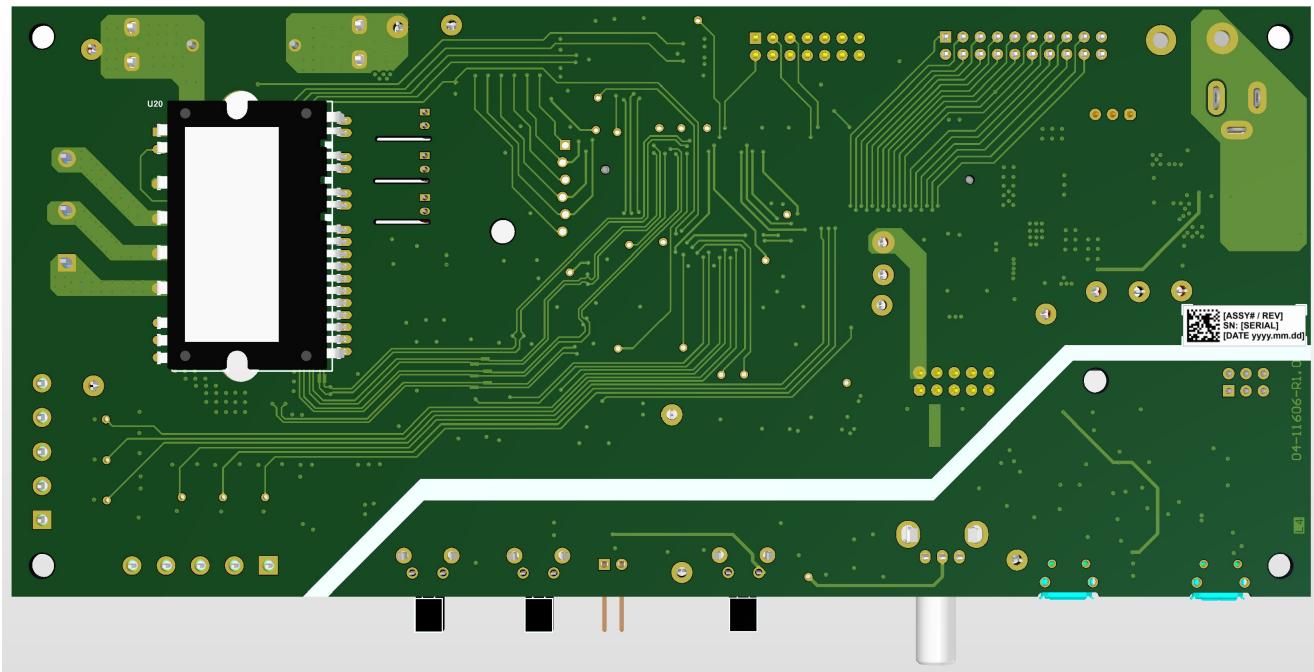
Inverter Board - Mid Layer 2: CopperFigure 2-19. Inverter Board - Bottom Silk and Bottom Copper
